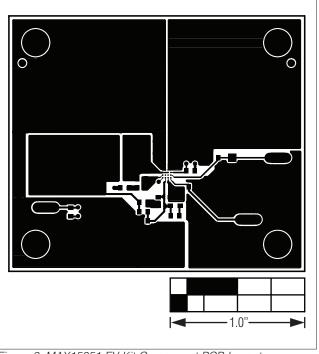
MAX15051 EV Kit Component PCB Layout—Component Side
